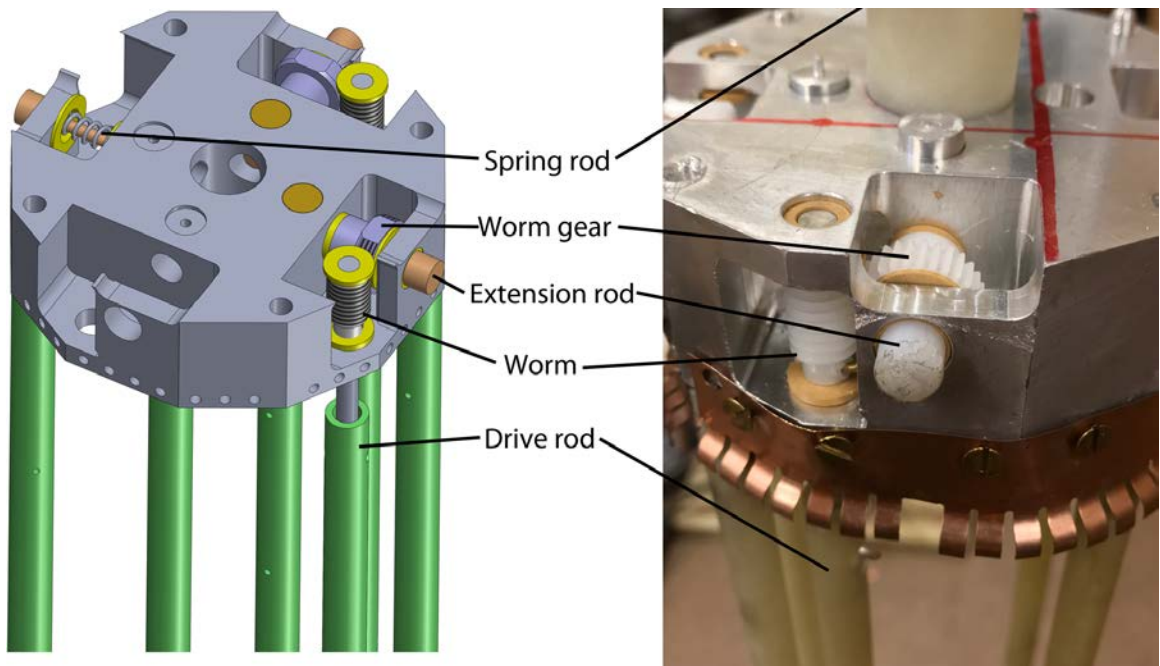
Diagram and picture of the cryogenic gearbox featuring worm, worm gear and thrust bearings.
